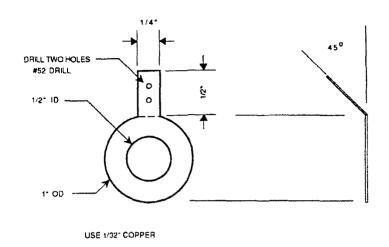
REYNOLDS HIGH-VOLTAGE CONNECTOR SOLDER LUG
